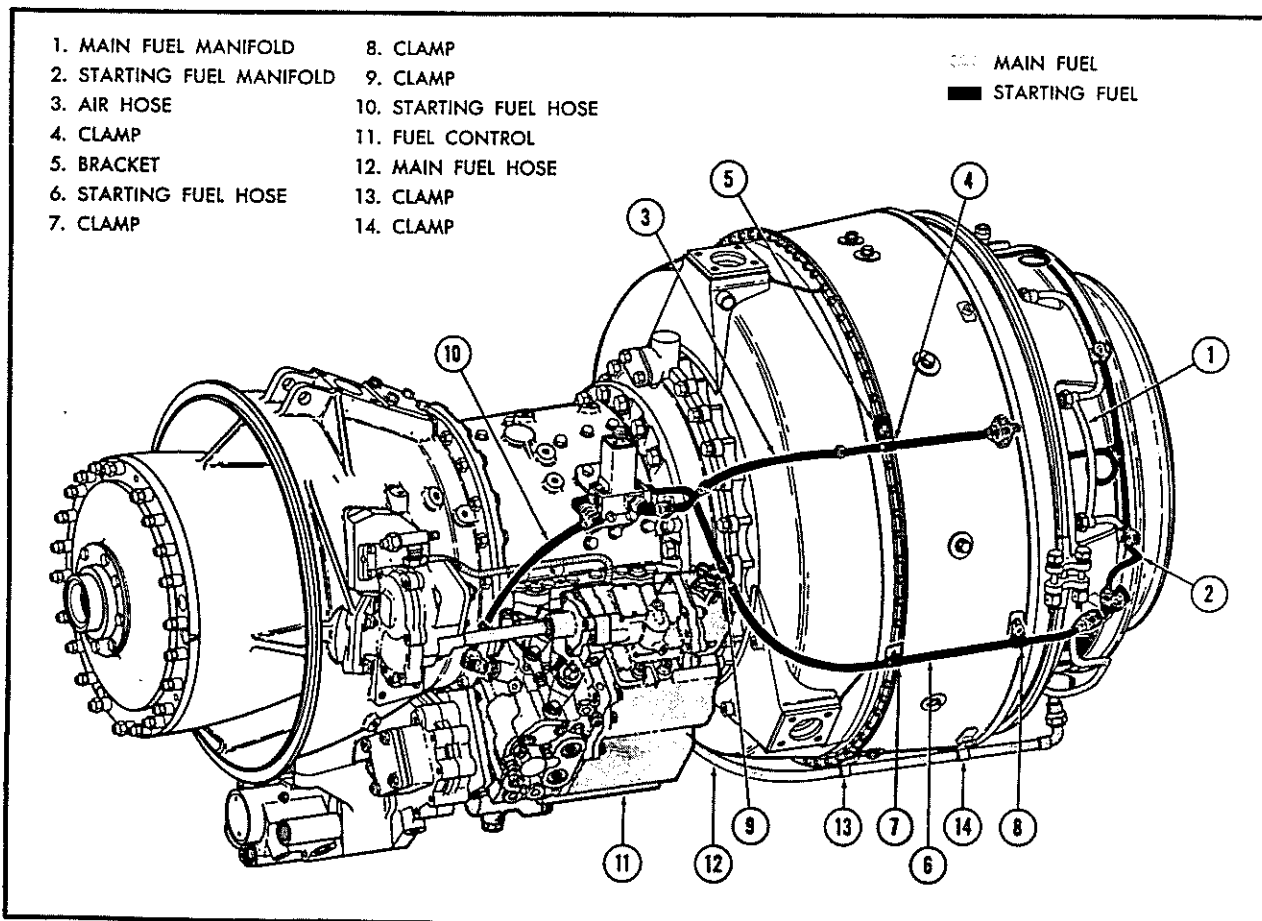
Left Side View of Starting and Main Fuel Manifolds and Hoses
